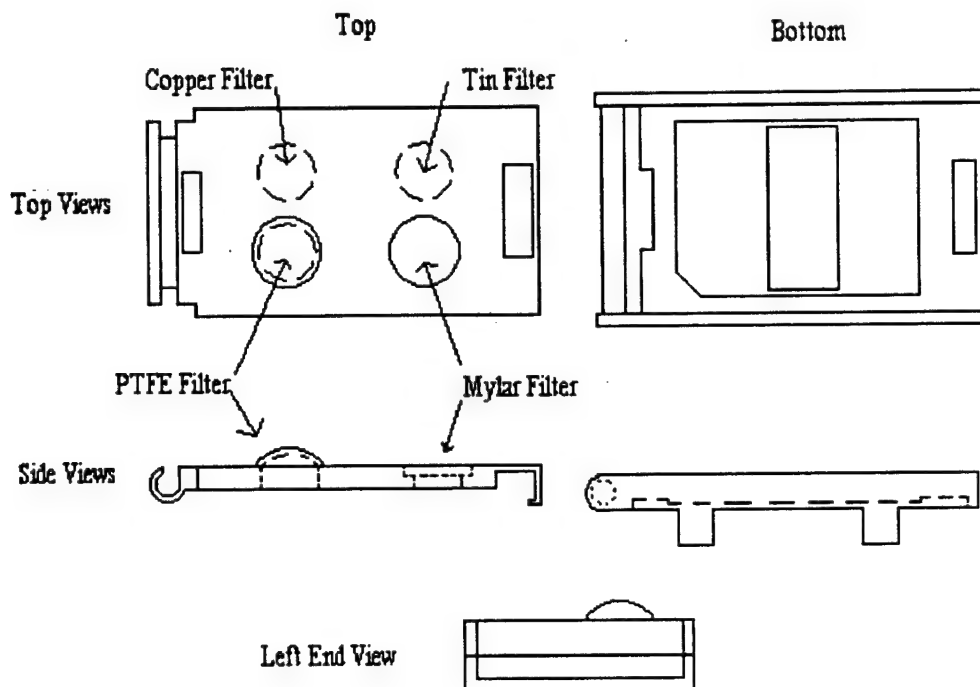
Diagram of Harshaw's 8825 card holder. The Naval Dosimetry Center will be using this card holder in the near future.
